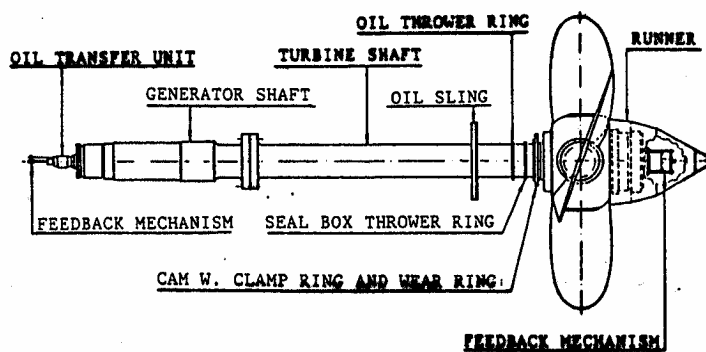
Bulb turbine rotating parts (Courtesy of Kvaerner Brug)
